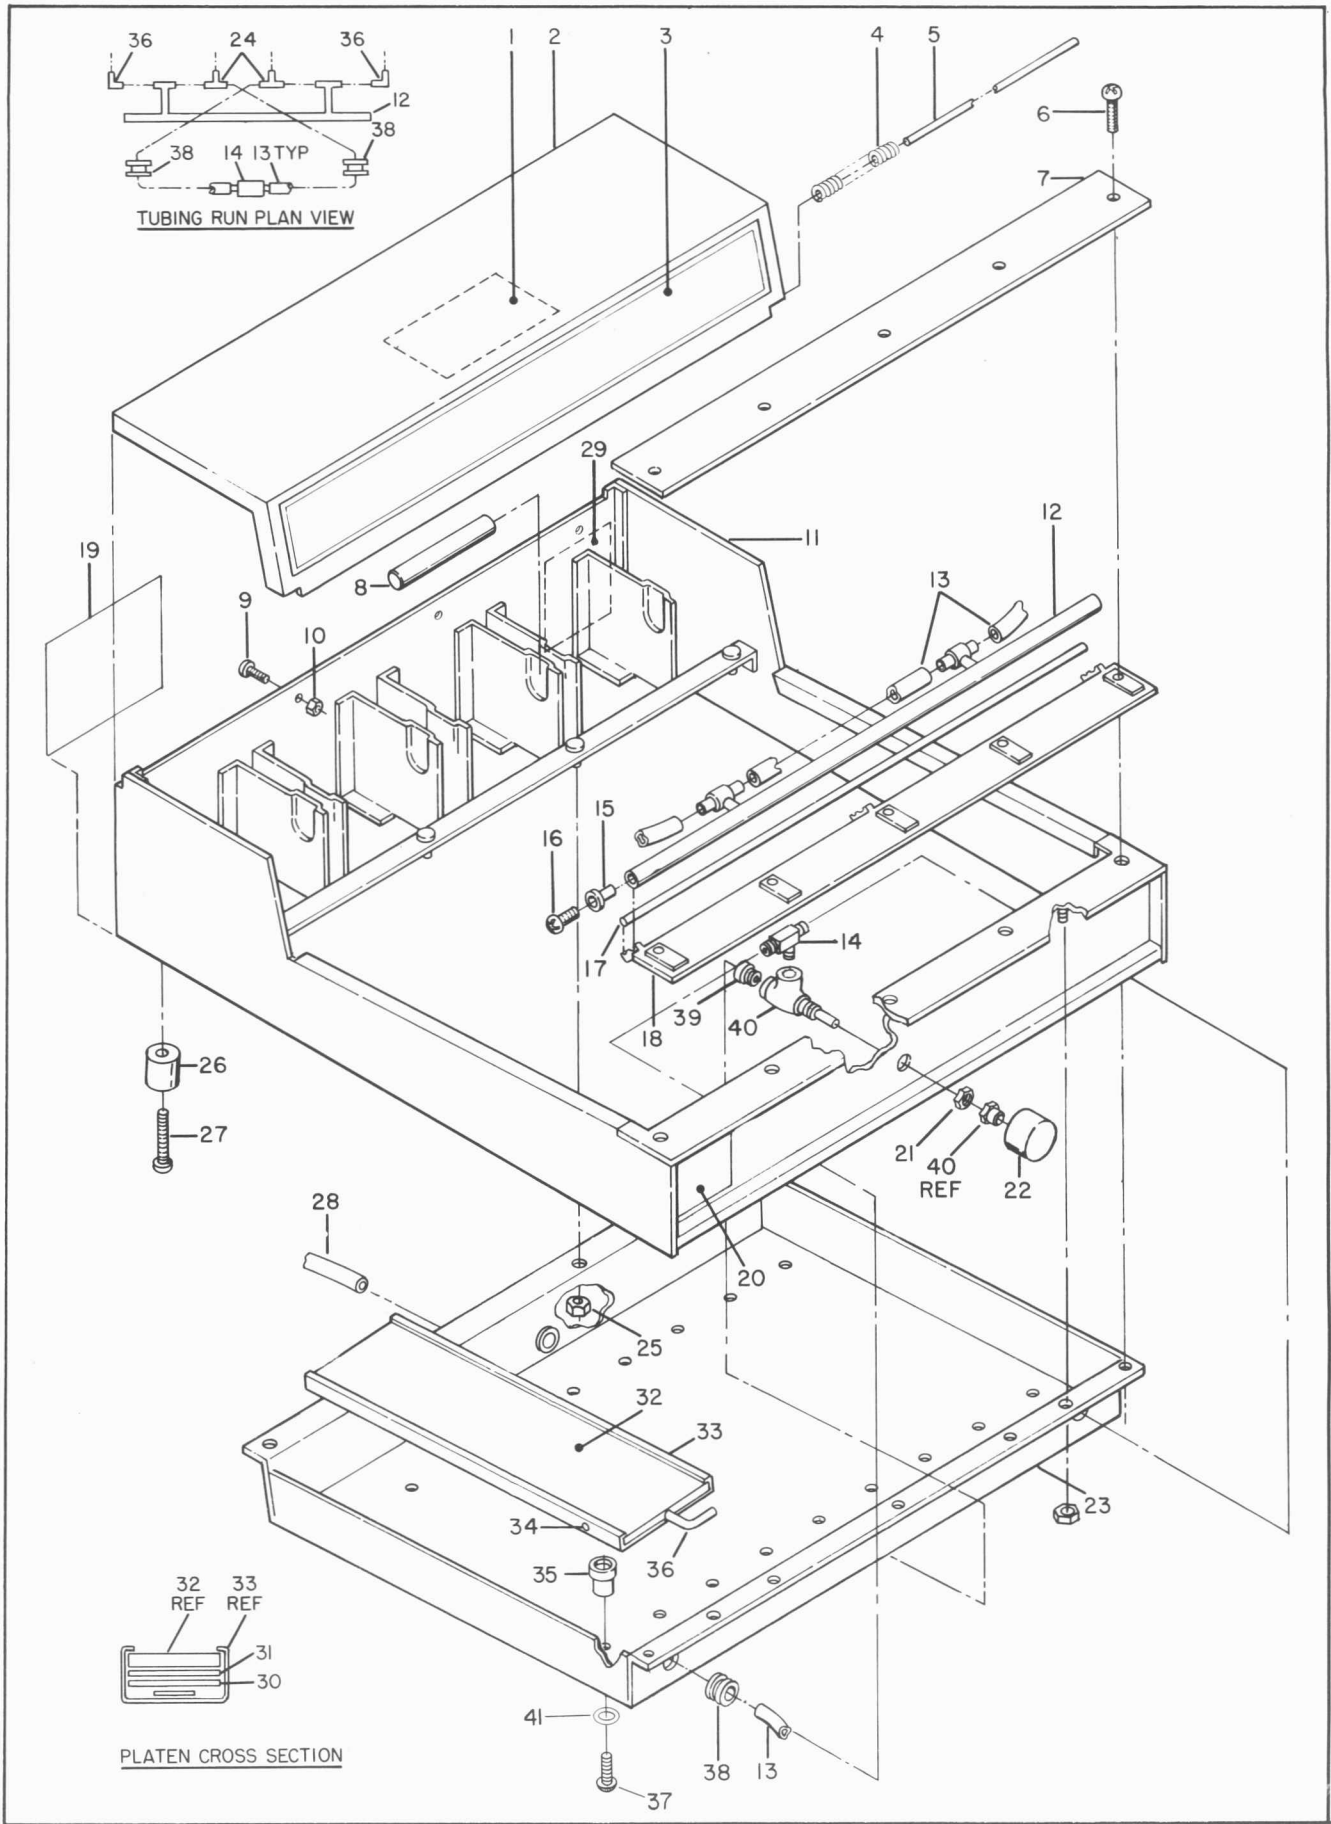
HANDIMET® II ASSEMBLY DETAIL
